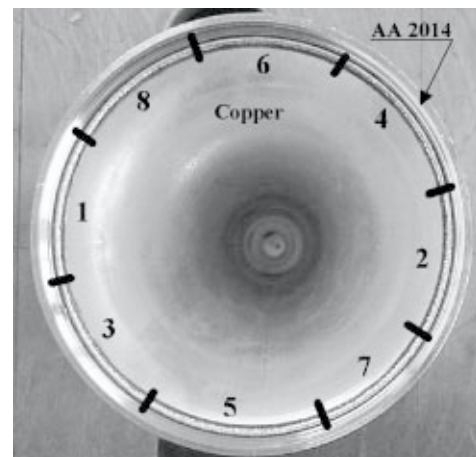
This figure shows a laser-welded component. The numbers indicates the sectors and in which order they are welded by using the opposite sector welding method.
